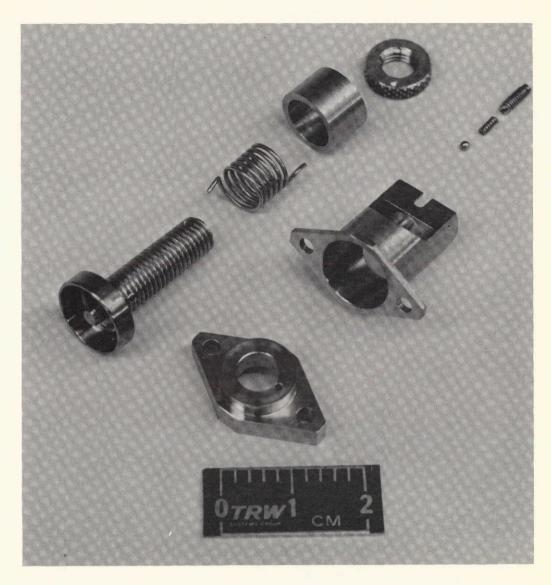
Tantalum Diaphragm Hand Valve Disassembly
